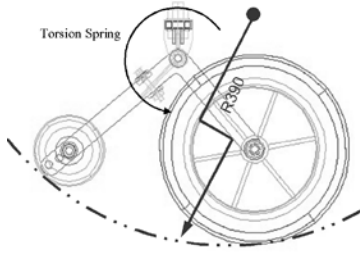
Front wheel suspension mechanism with a V-shaped arm
